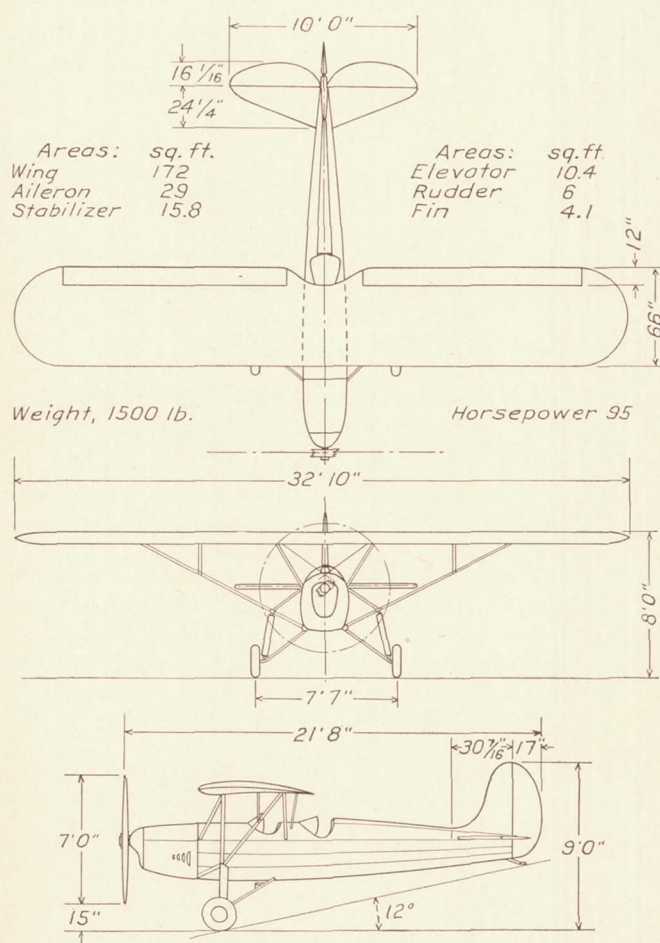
Three-view drawing of the Fairchild 22 airplane.
